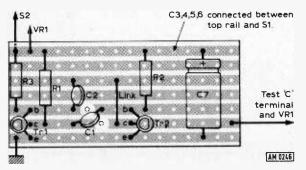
Components comprising the audio oscillator are mounted on Veroboard as shown above.
